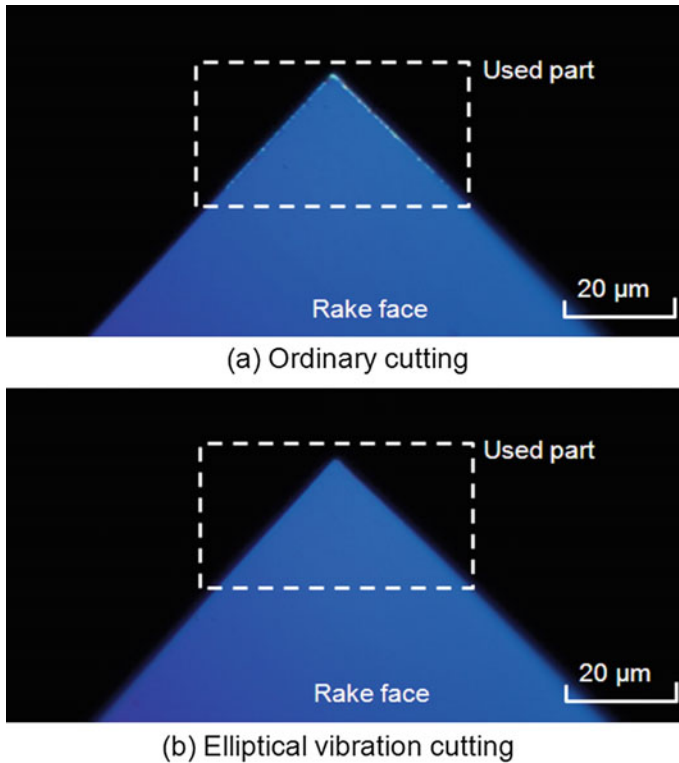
Microphotographs of V-shaped tool edge in different cutting methods [36]
